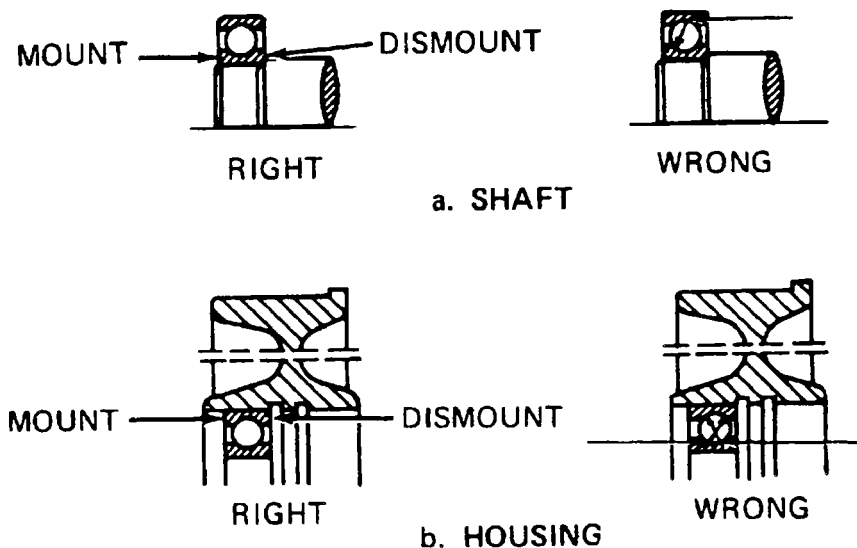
Application of Mounting and Dismounting Forces to Tightly Fitted Bearing Rings
